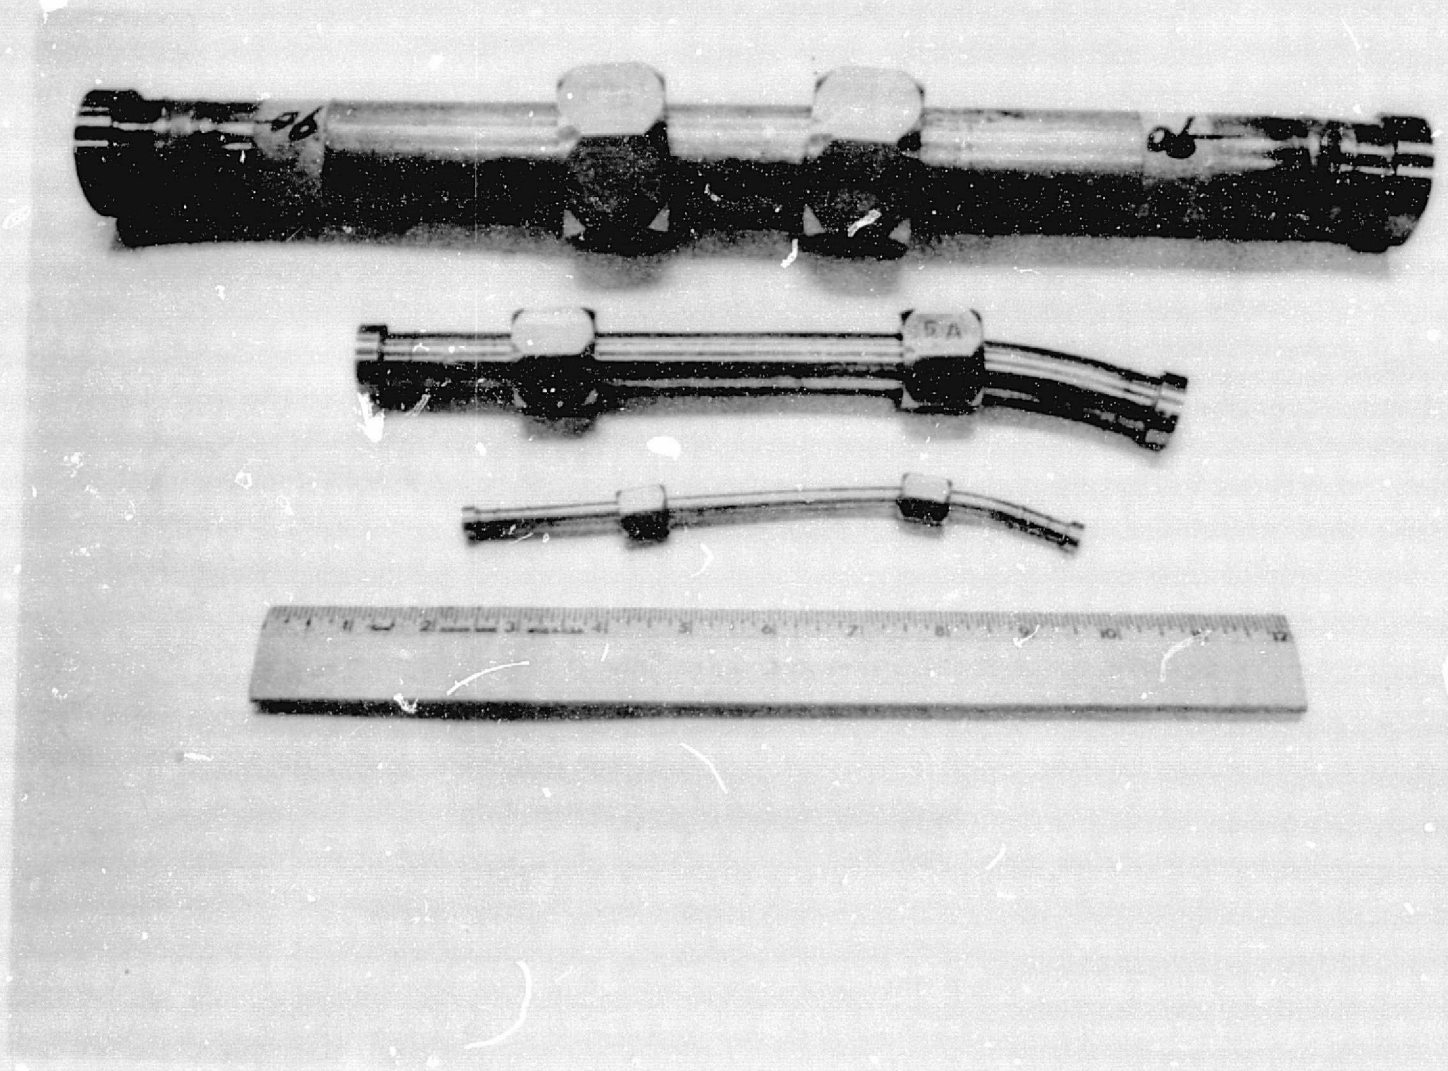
Tubing Specimens in 1/4, 3/4, and 1 1/2 Inch Sizes, Welded by the Automatic Process
